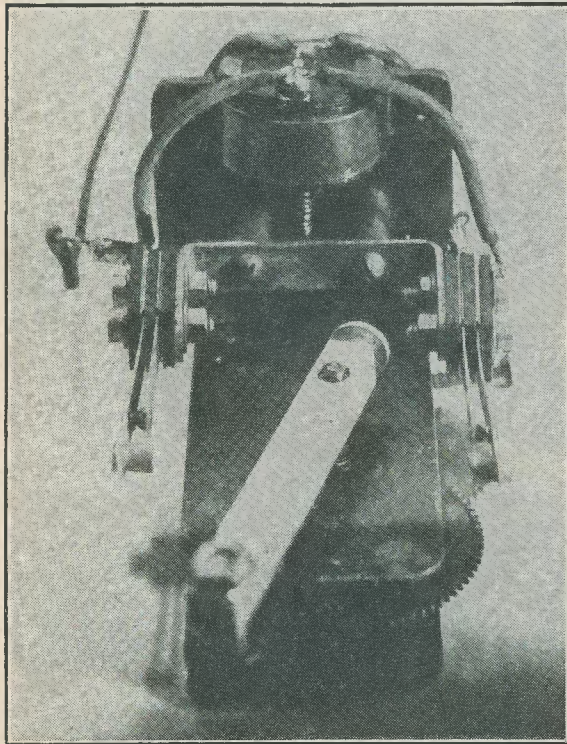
Shows the arrangement of the limiting switches, the method of connecting motor to extended governor shaft, and the mounting of the motor
